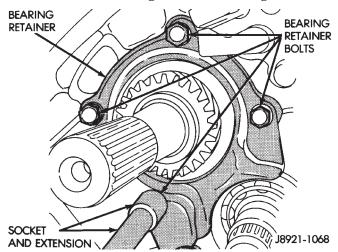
Removing Output Shaft Rear Bearing Retainer Bolts
